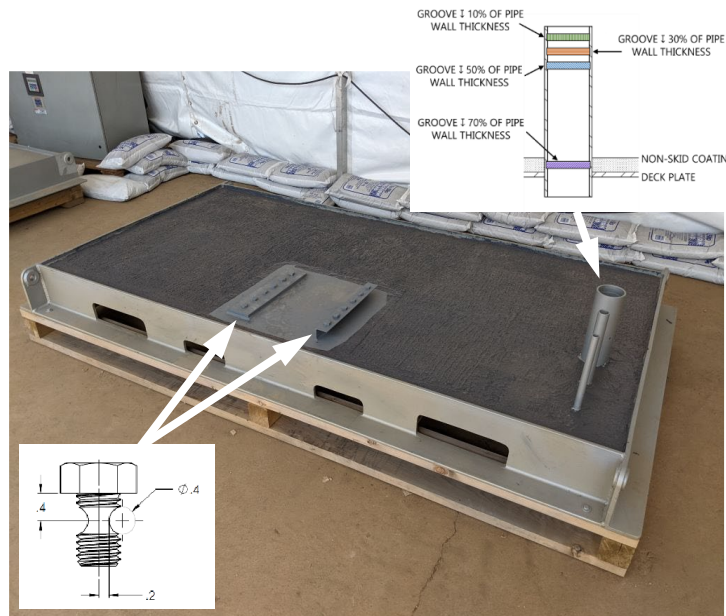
Non-skid decking / crevice corrosion test panel. Large circular defects representing general corrosion and small blind holes representing pitting corrosion were machined into the front side of the plate at depths ranging from 10 to 50% of the material thickness. Crevice corrosion was represented by thinning the bolts (bottom inset, dimensions are in inches) and inner diameter of the pipes just above where they were joined to the base plate (top inset). (Drawings courtesy of M. Legge, Naval Engineering Test Establishment, Department of National Defence, Government of Canada).
